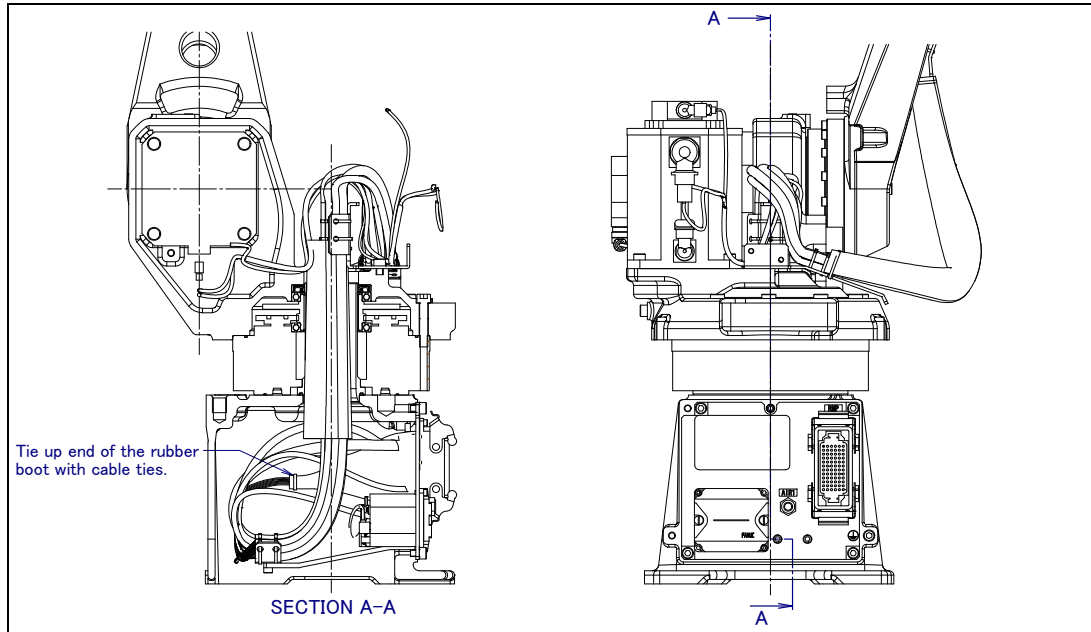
(k) Replacing cable kit (J1 connector plate part 2)
